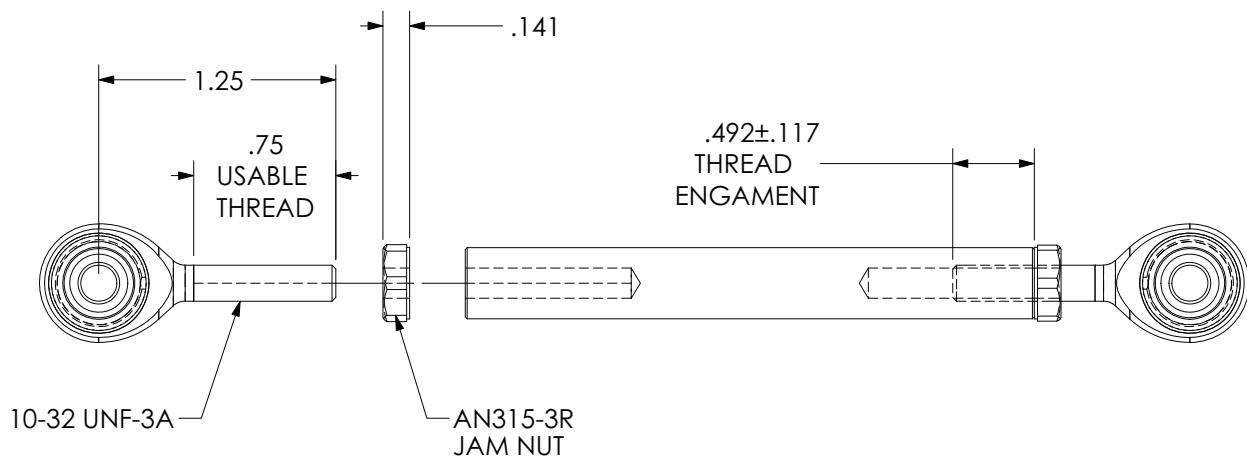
General Dimensions For Servo Push Rod And Rod End Bearings
